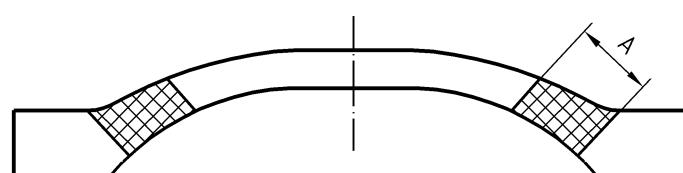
Typical casting section showing required radiographic examination of dished cover
